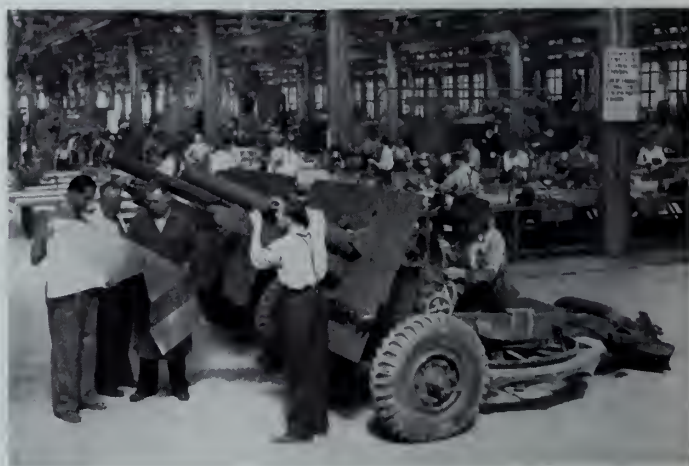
Assembling 25-pounder gun, showing arrangement of firing platform, trail, spade, etc.
